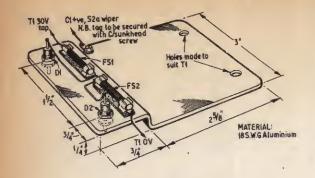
Details of the heatsink for D1, D2 which is mounted on top of transformer T1
